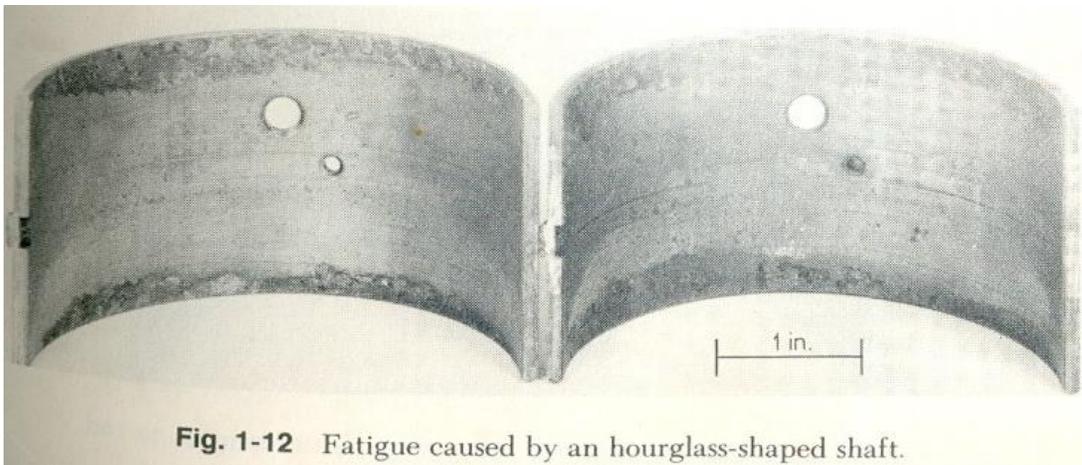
Fatigue caused by an hourglass-shaped shaft.
